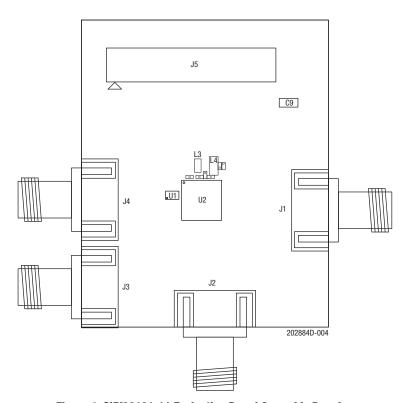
SKY66101-11 Evaluation Board Assembly Drawing
